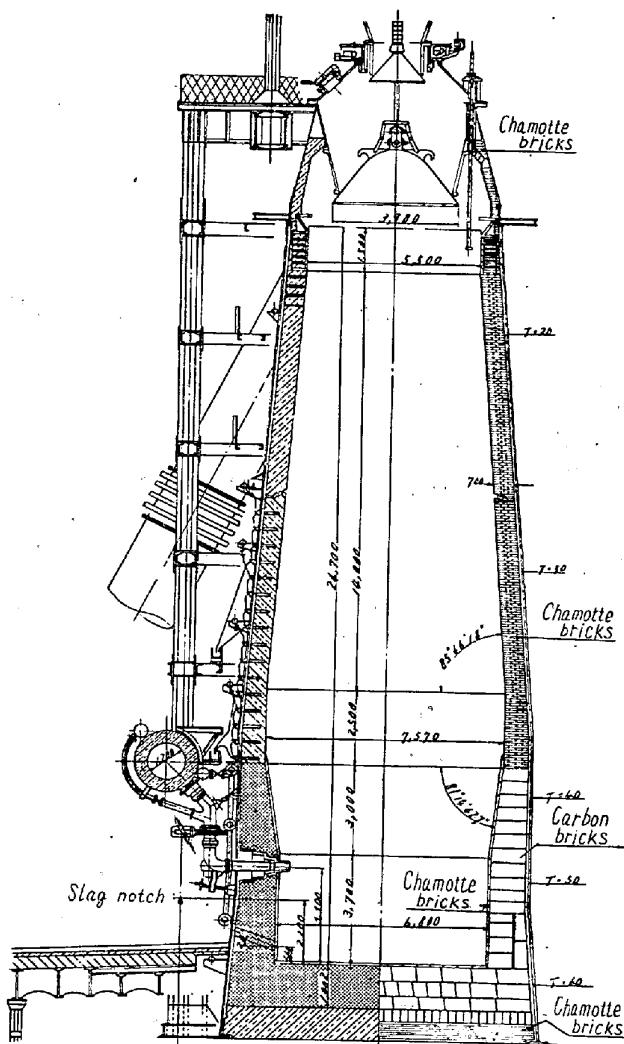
Kukioka No. 1 blast furnace, reconstructed (Yawata Iron &amp; Steel Works)
